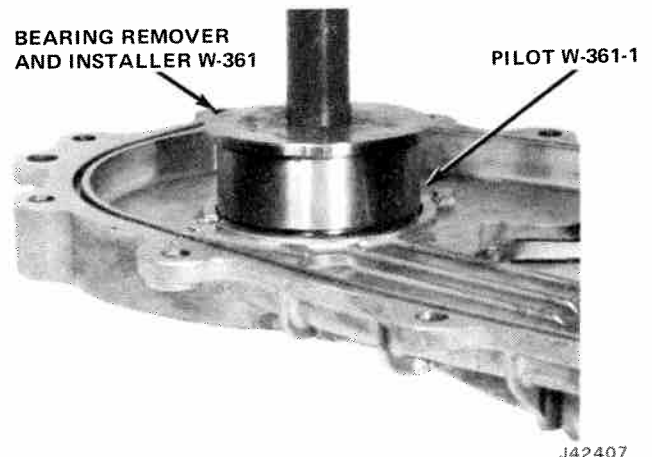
Removing Drive Sprocket Rear Needle Bearing
